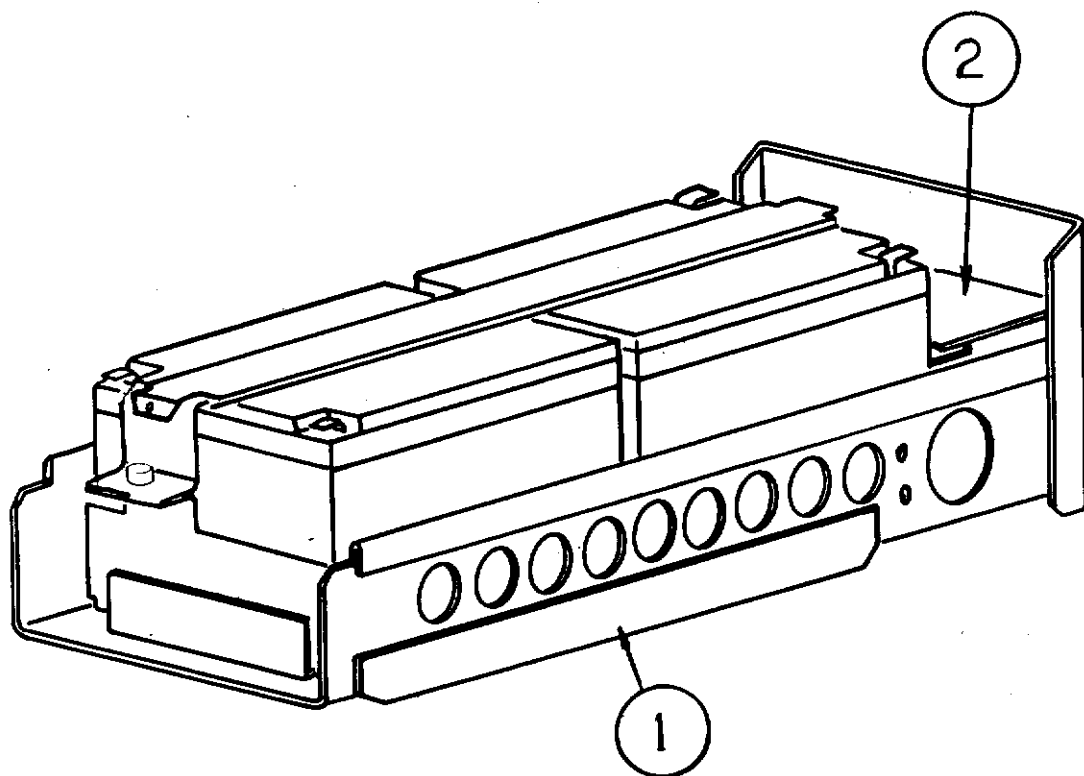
PARTS LOCATION DIAGRAM, BATTERY/CHARGER TRAY ASSEMBLY
